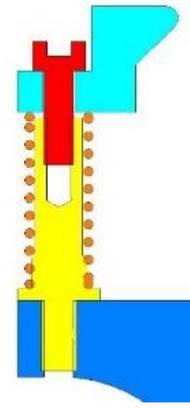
Temporary assembly bolt maintaining the spring compressed and rings aligned during assembly.
